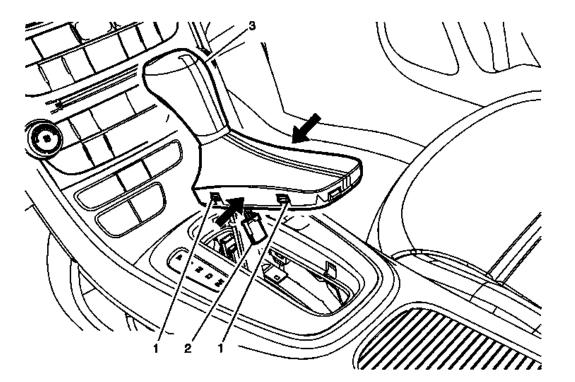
Transmission Control Lever Knob Courtesy of GENERAL MOTORS COMPANY
